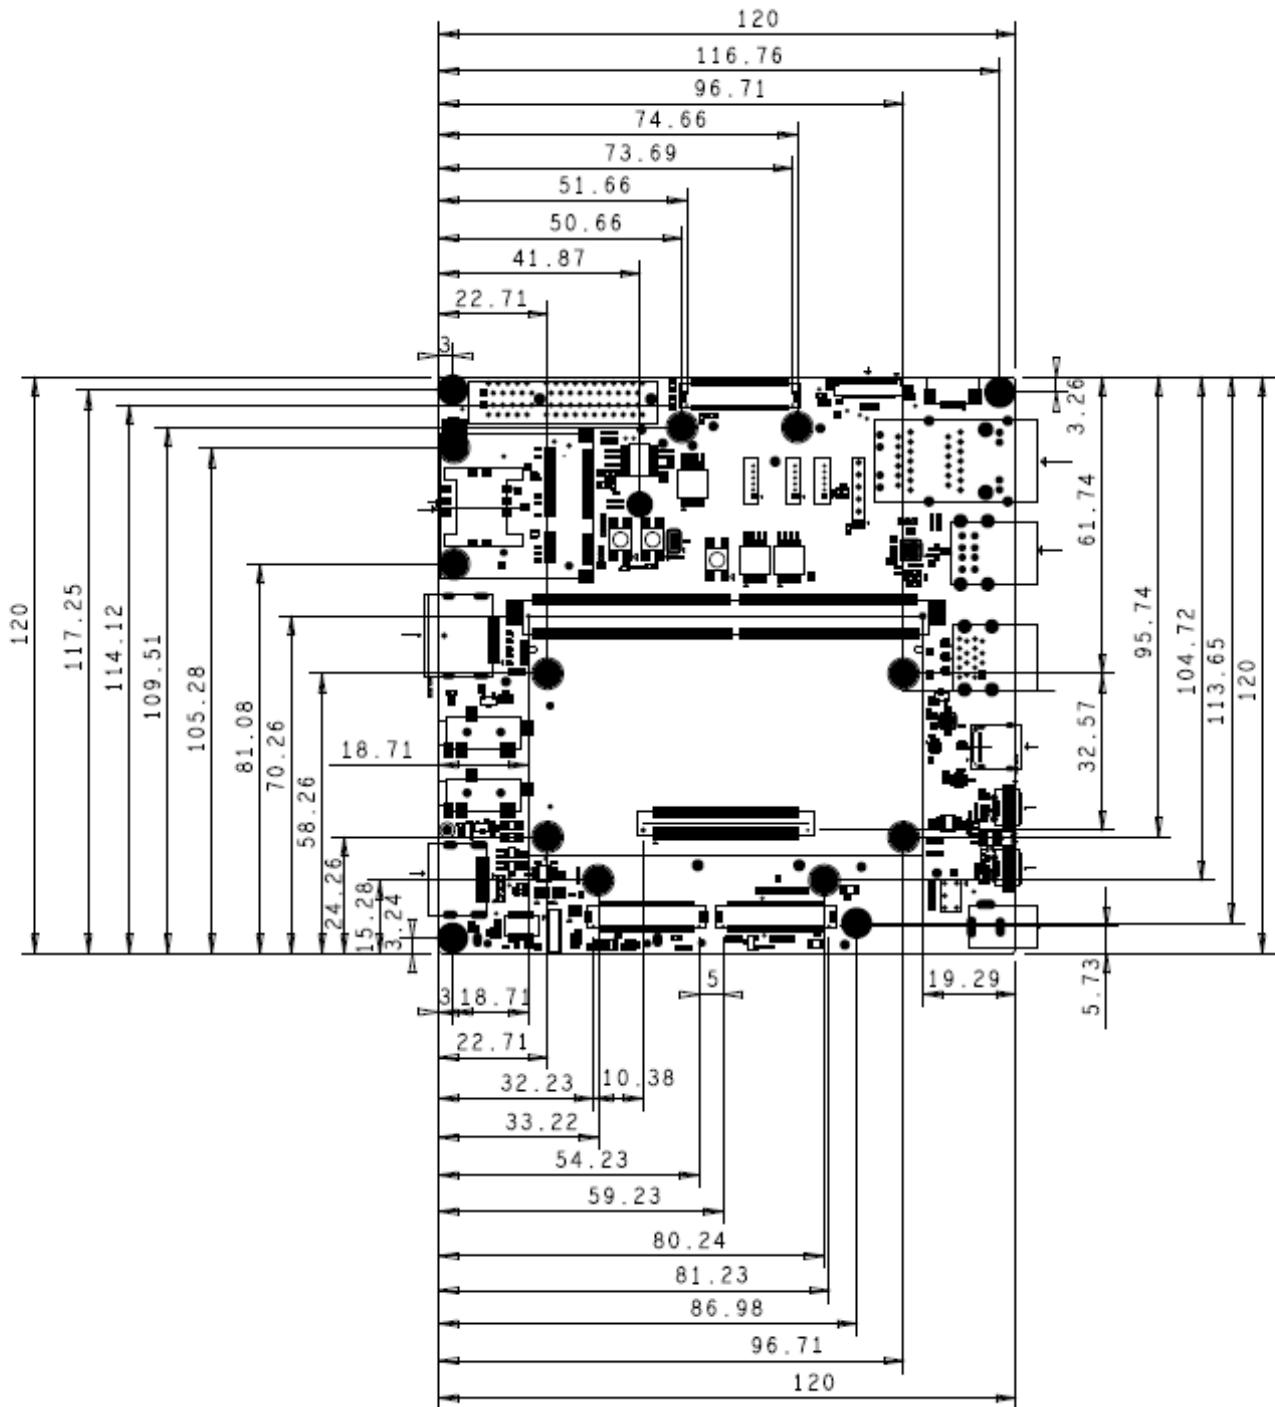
Mechanical dimension of i.MX8M Q/QL/D SMARC Carrier Board- Top View
